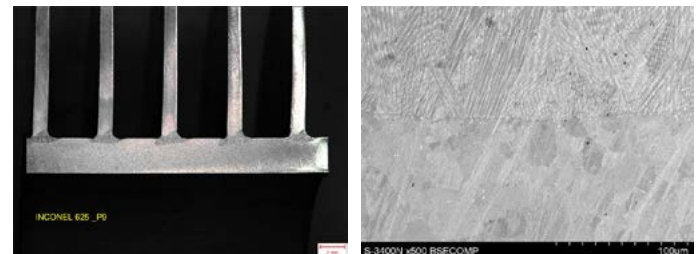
Macrostructure of the laser beam welded joint made using a power of 2kW, rotation rate of 20 rev./min (a); microstructure of the Inconel 625 alloy welded joint (b)
